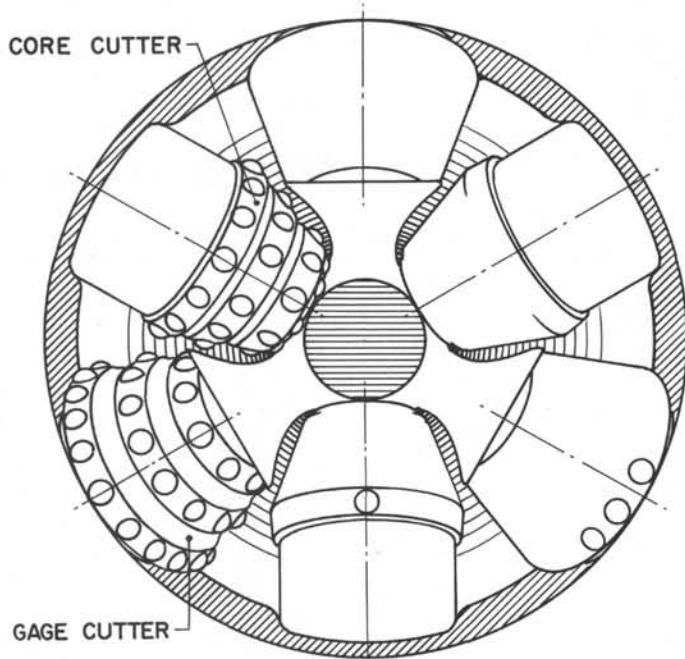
Six cutter tungsten carbide insert core bit (first tungsten carbide insert roller core bit used on DSDP).
